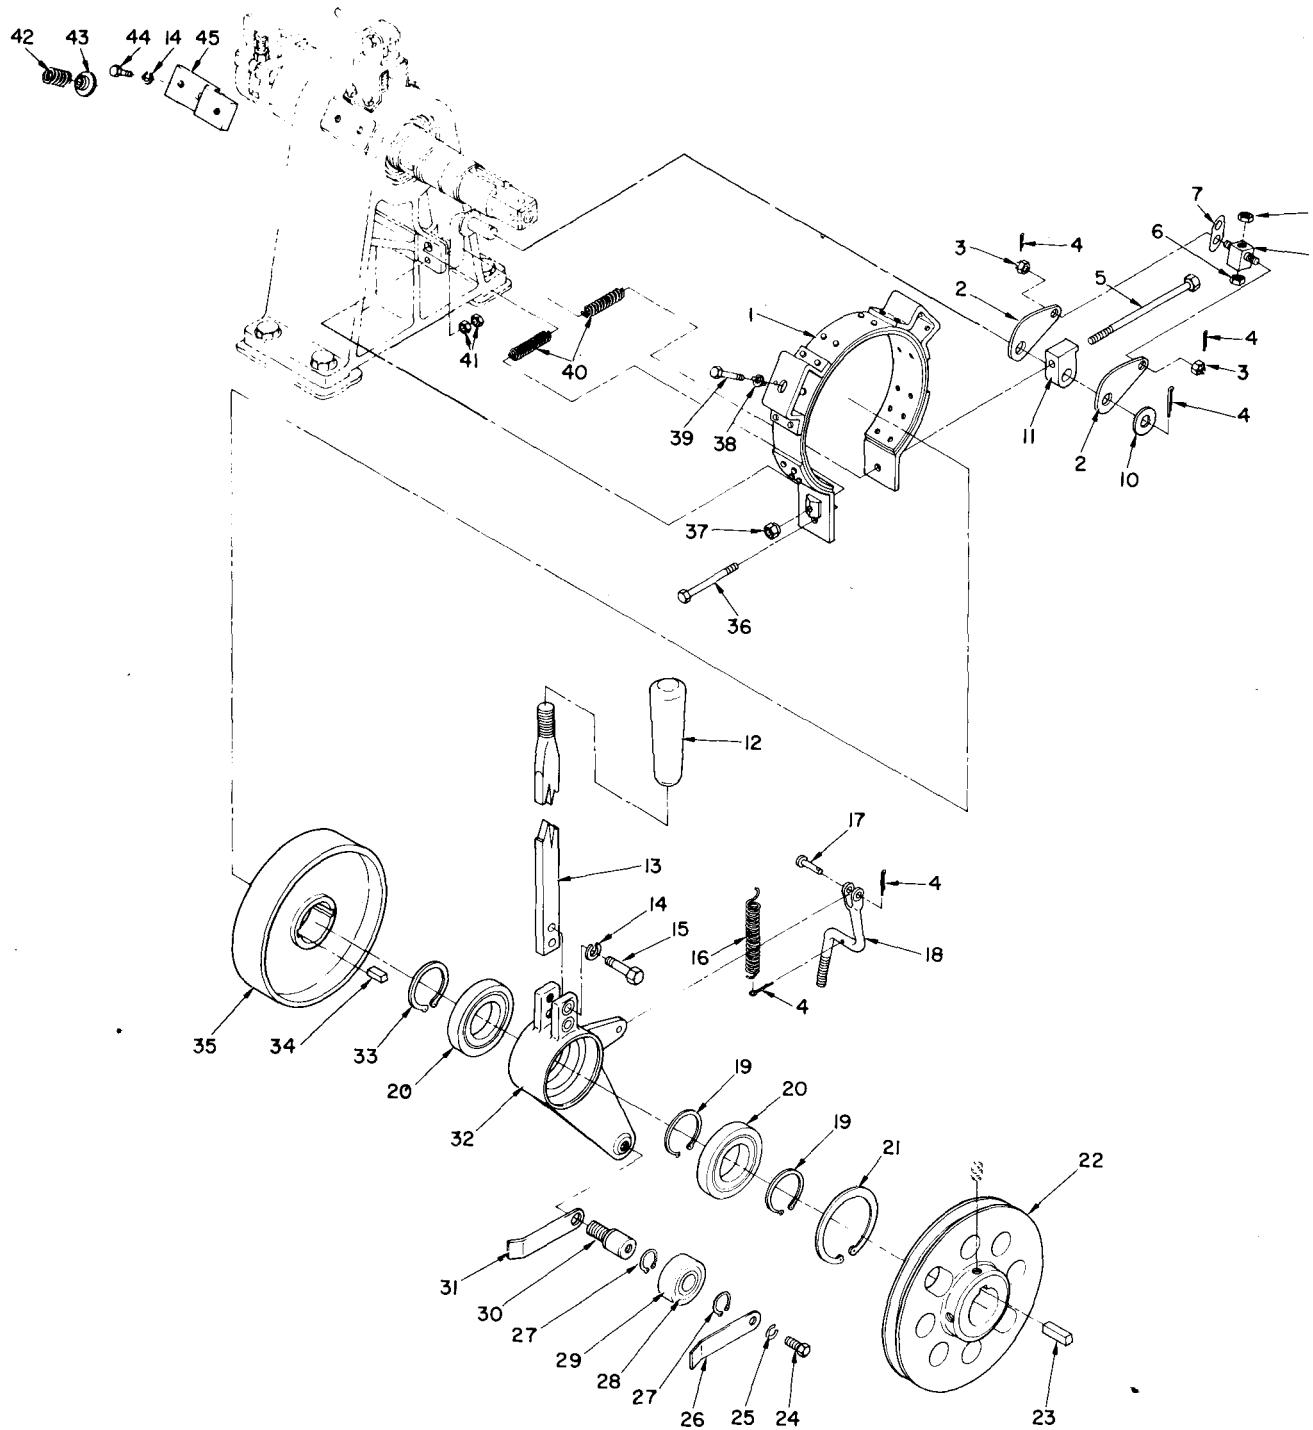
Clutch and Brake Assembly 1A1 (Sheet 1 of 2).
